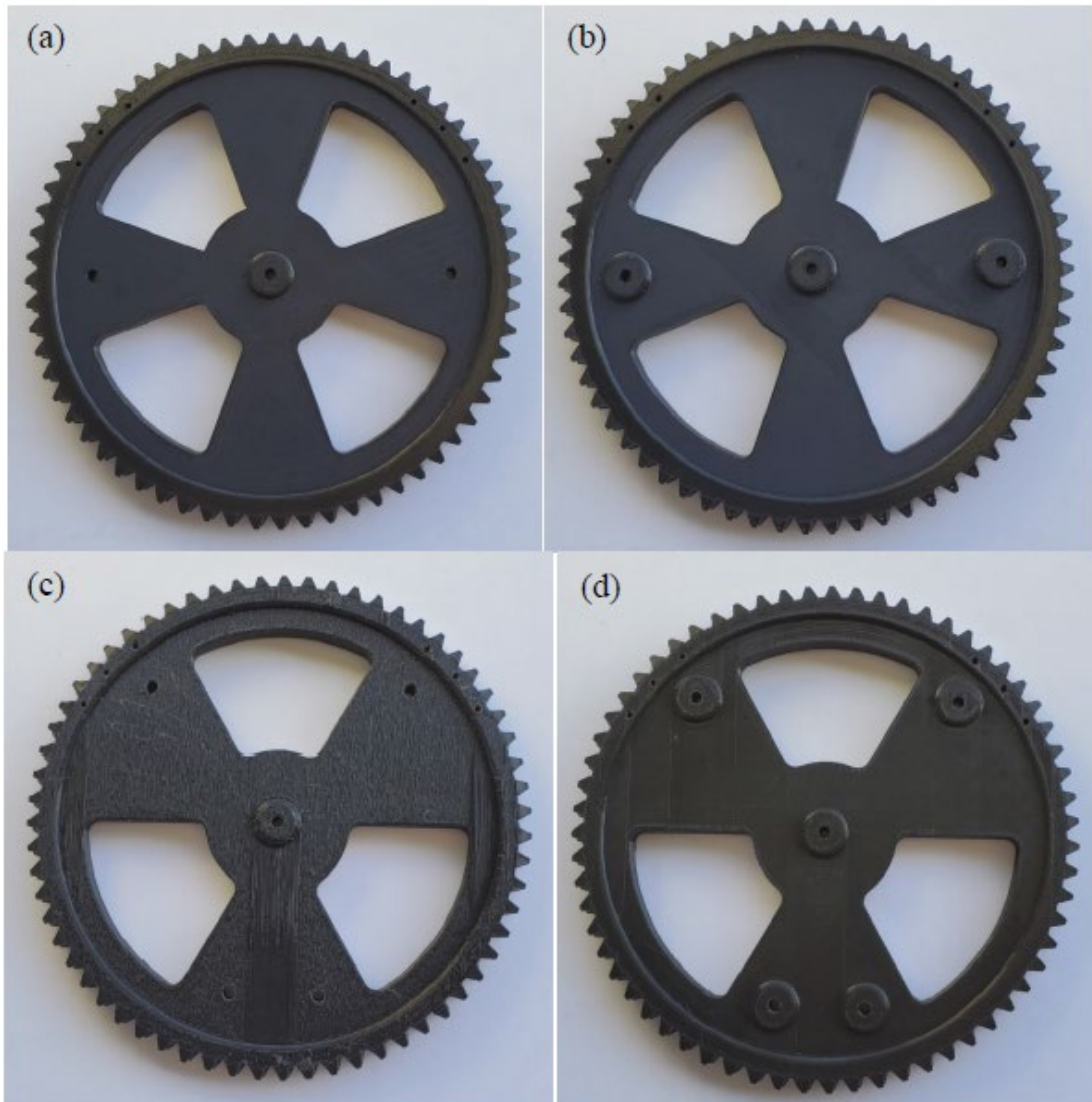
3D printed gears: (a) gear type 1-front side, (b) gear type 1-rear side, (c) gear type 2-front side, and (d) gear type 2-rear side.
